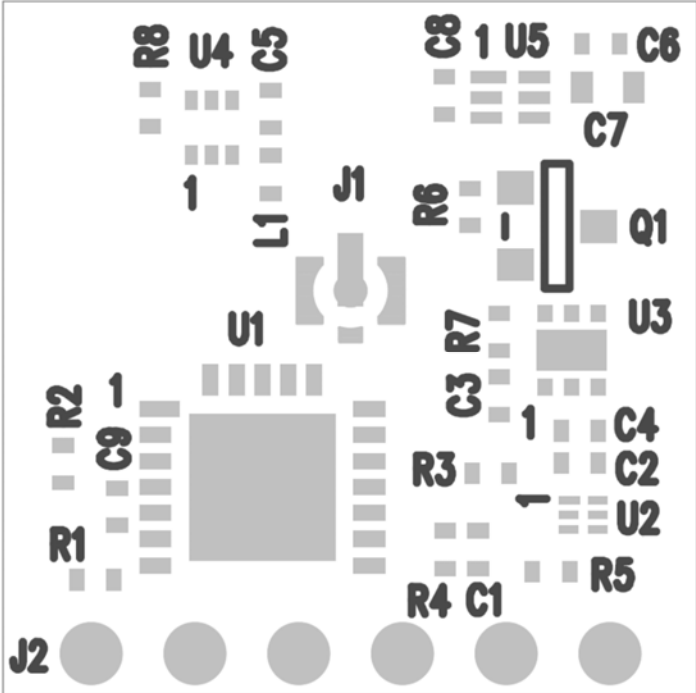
INTERFACE ADAPTER BOARD COMPONENTS PLACEMENT
